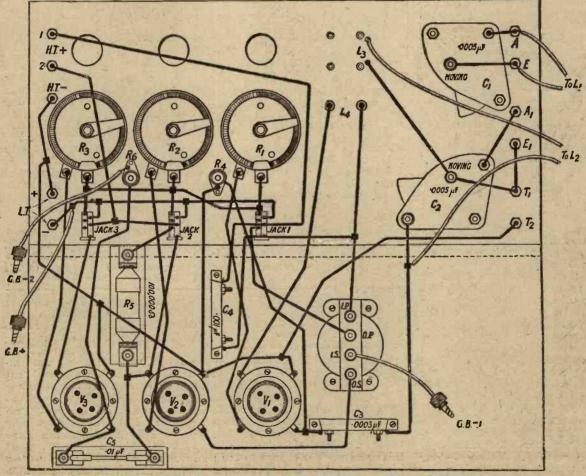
This drawing shows the positions of the components on the baseboard, together with the actual wiring of the receiver. Blue Print No. C1015B.
